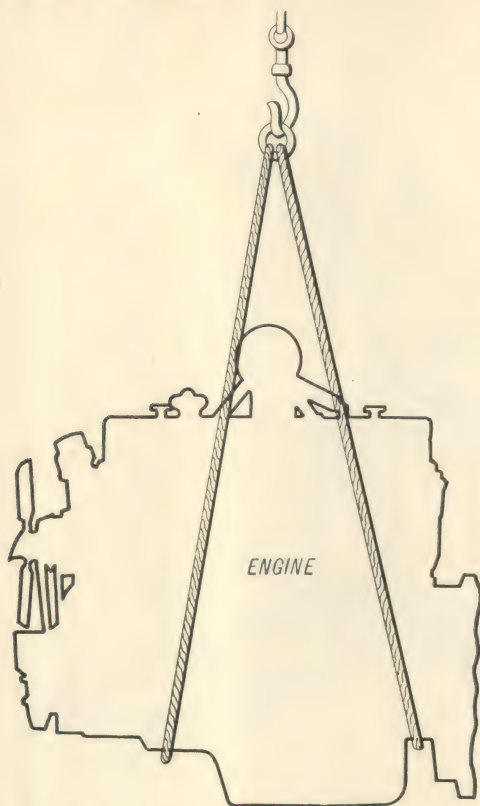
METHOD OF SLINGING AN ENGINE FOR LIFTING OUT OF THE CHASSIS
